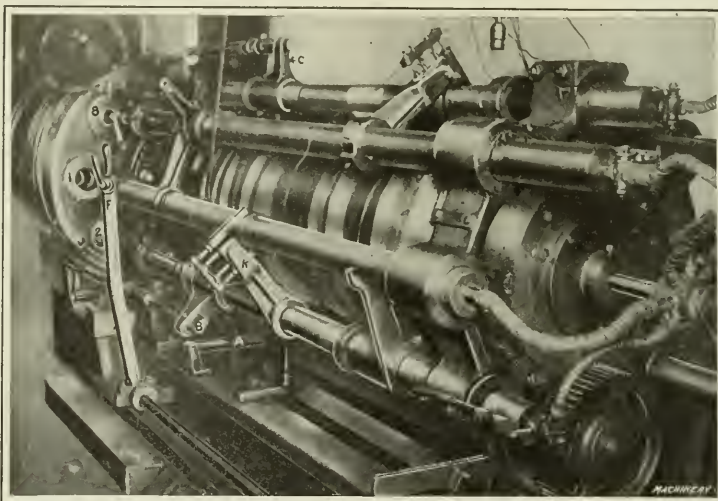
Semi-automatic Shell Making Machine for performing Operations on Interior of British 18-pounder High-explosive Shells
